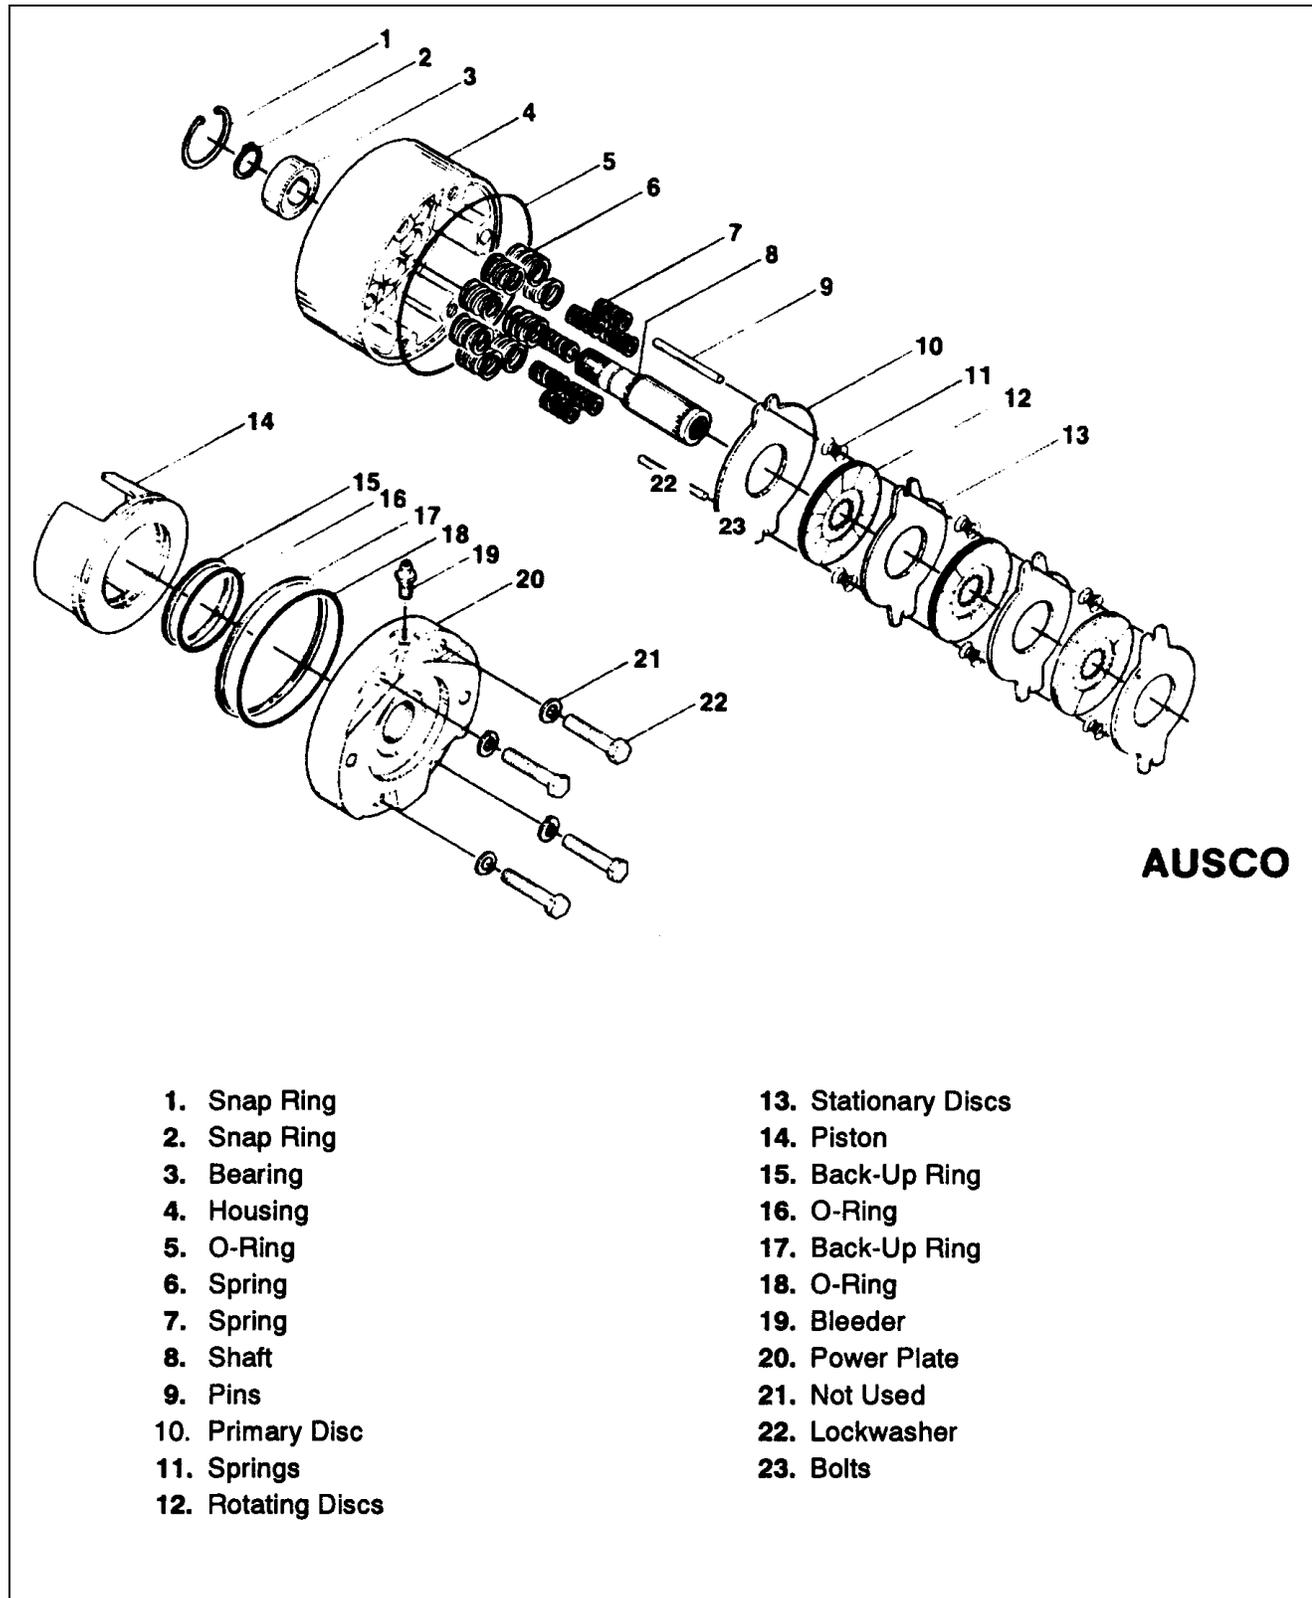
Drive Brake, (machines Built Prior to May 1992).
